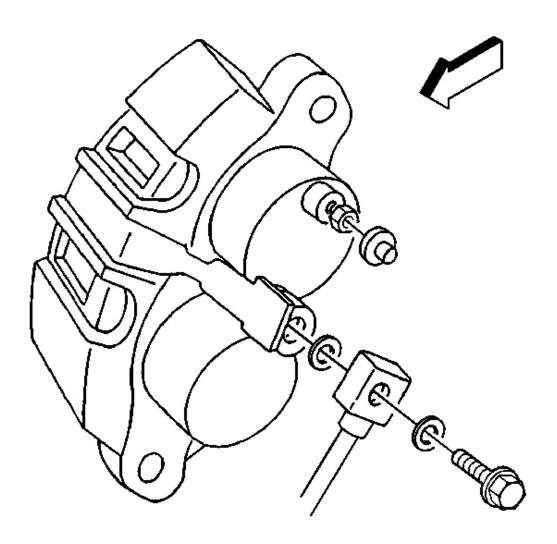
View Of Banjo Fitting To Caliper Courtesy of GENERAL MOTORS CORP.
